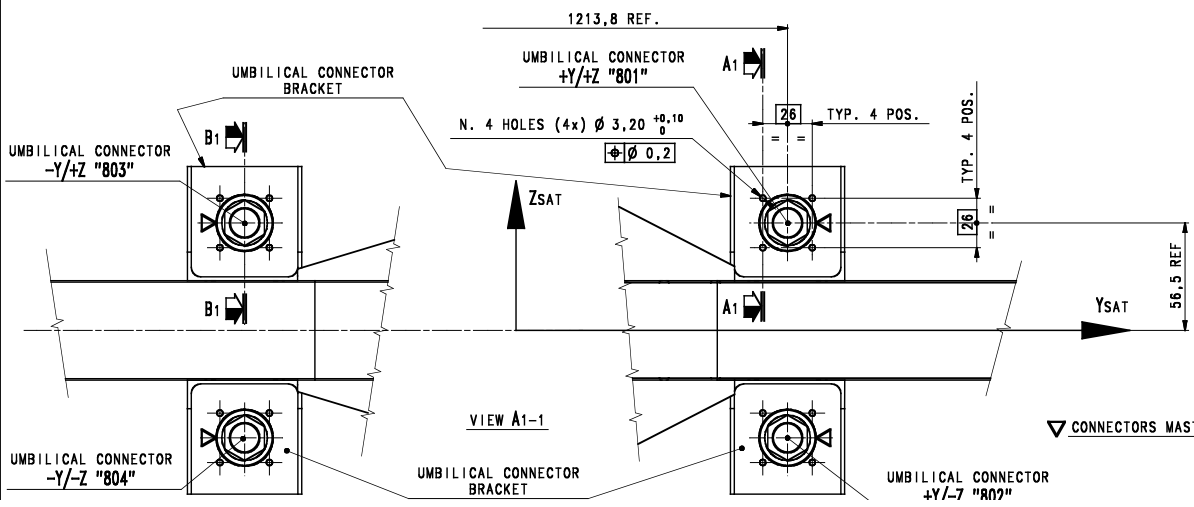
“GOCE S/L LVA RING DIMENSION” (CASA DRAWING)
